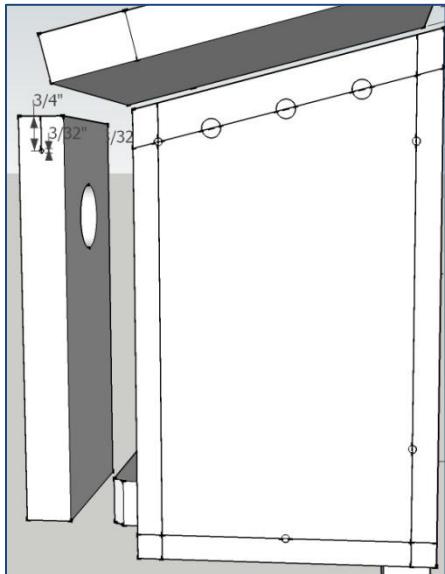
Nest box left side, absent bottom left 5/32" screw hole; top of door 3/32" pilot hole
